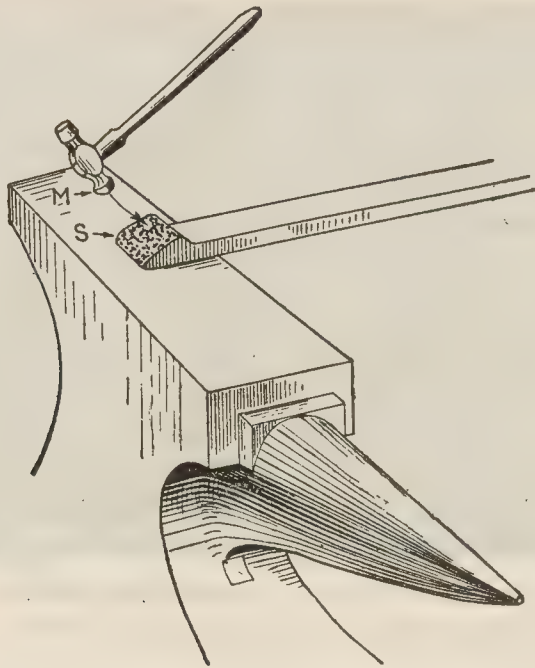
,000.—Making a scarf for a scarf weld. To do this, the upset end is thinned down, generally with the peen of the hammer, drawing it out thin at the point and crowding the metal together at the stock by drawing the hammer as shown at M. The faces to be welded should be rounded as shown at S, so that the pieces first come in contact at the center, in order to give the slag and impurities an opportunity to squeeze out as the weld is being closed.
